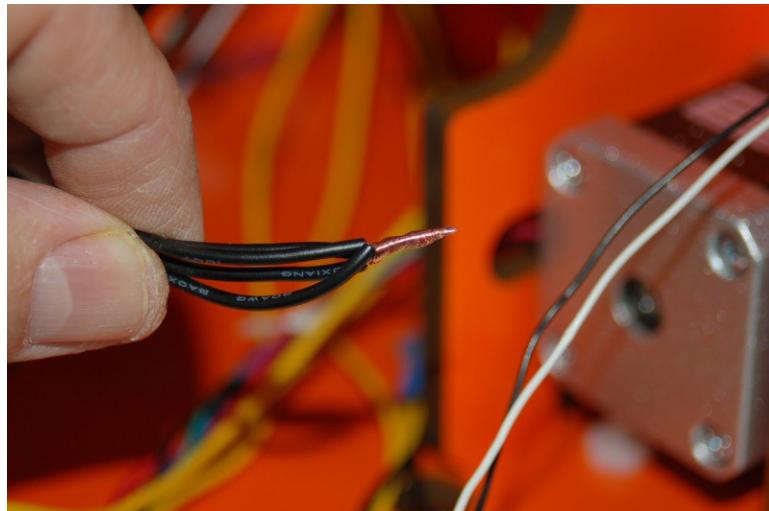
Twisting the ground wires together for the heated bed supply.
